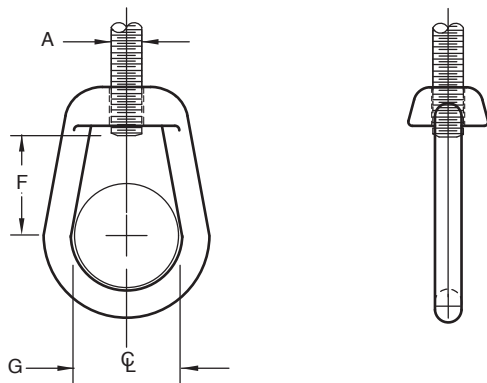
FORGED WELDLESS EYENUT
